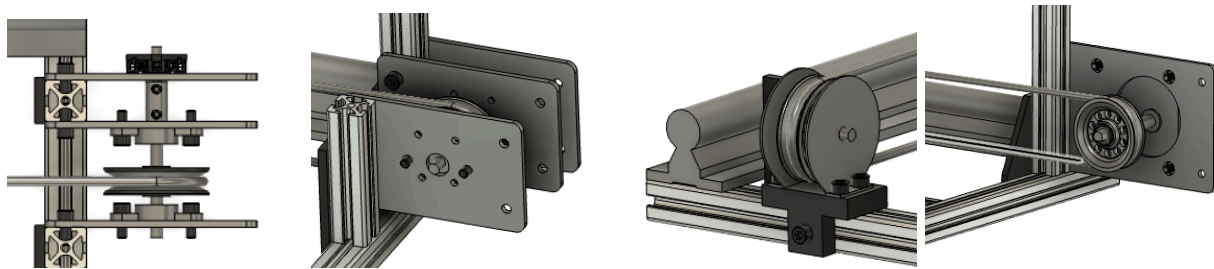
CAD model of assembly, including cables and motor/encoder mounts
